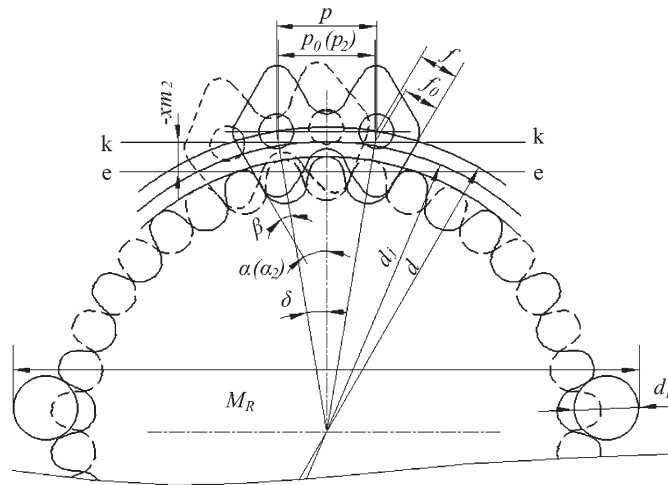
The design system of the double-side meshing and dual-phase driving silent link plate-sprocket-hob
